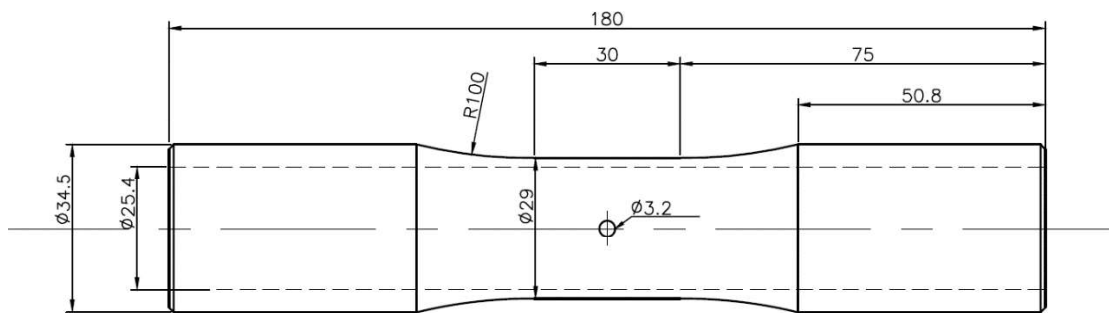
Shape and dimensions of 2024-T3 aluminium alloy notched tubular specimen.
